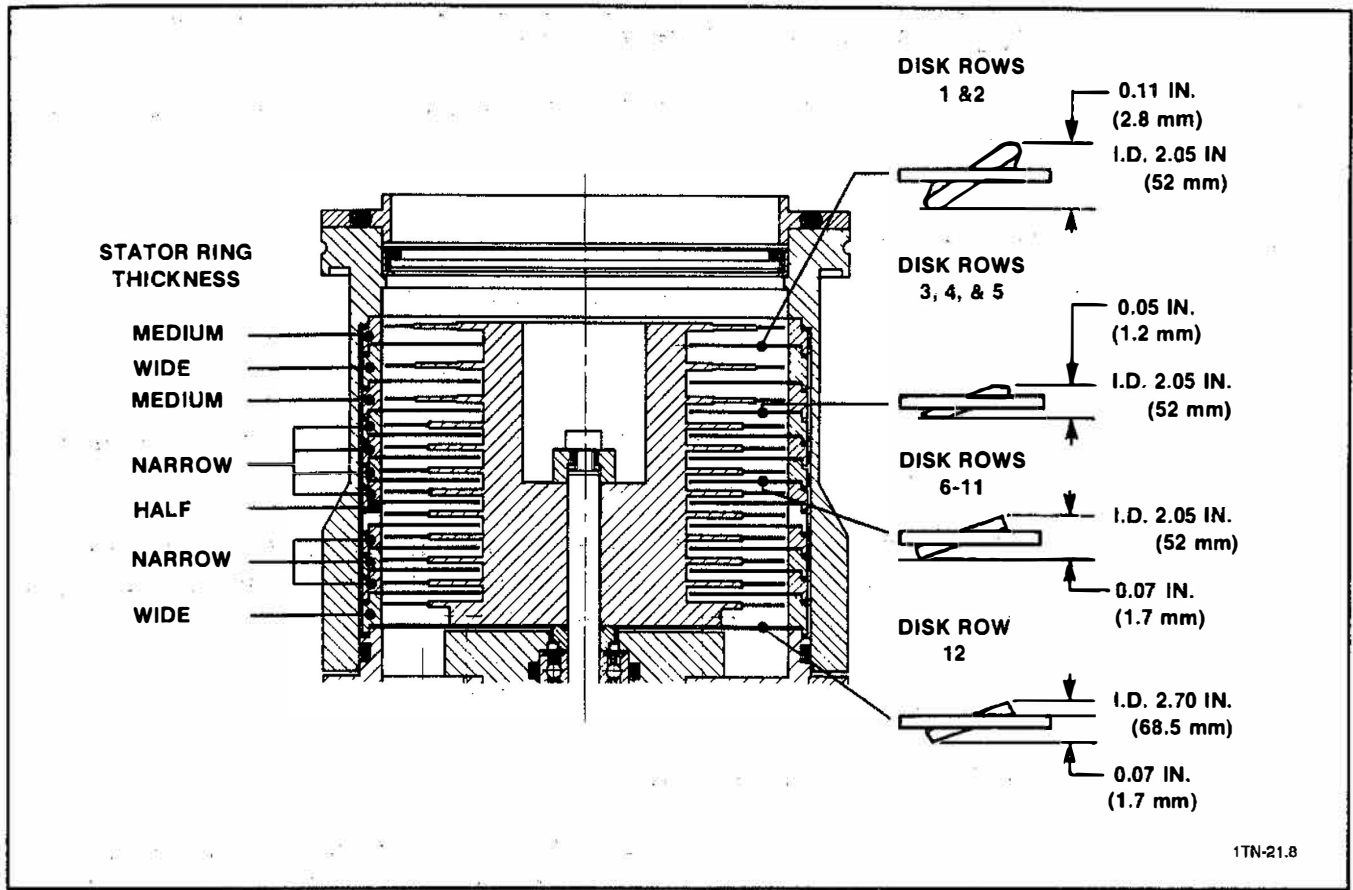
TMP150 V/H Stator Disk and Ring Placement
